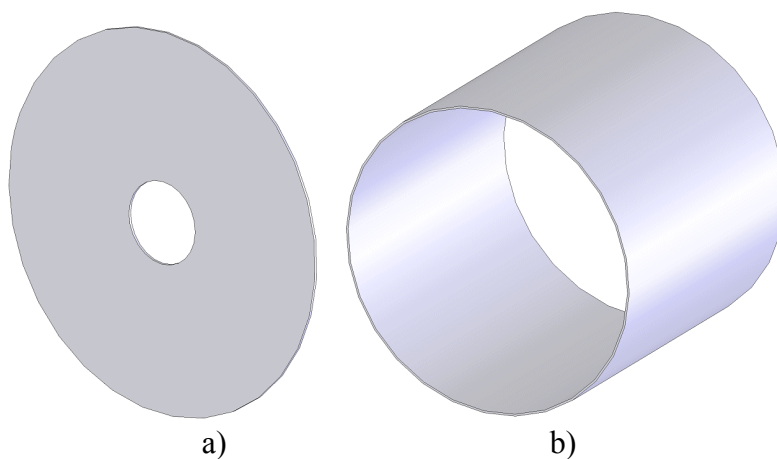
Part of damper winding topologies for a) axial and b) radial flux permanent magnet synchronous machines. The damper windings consist of plates installed over the rotor surfaces.
